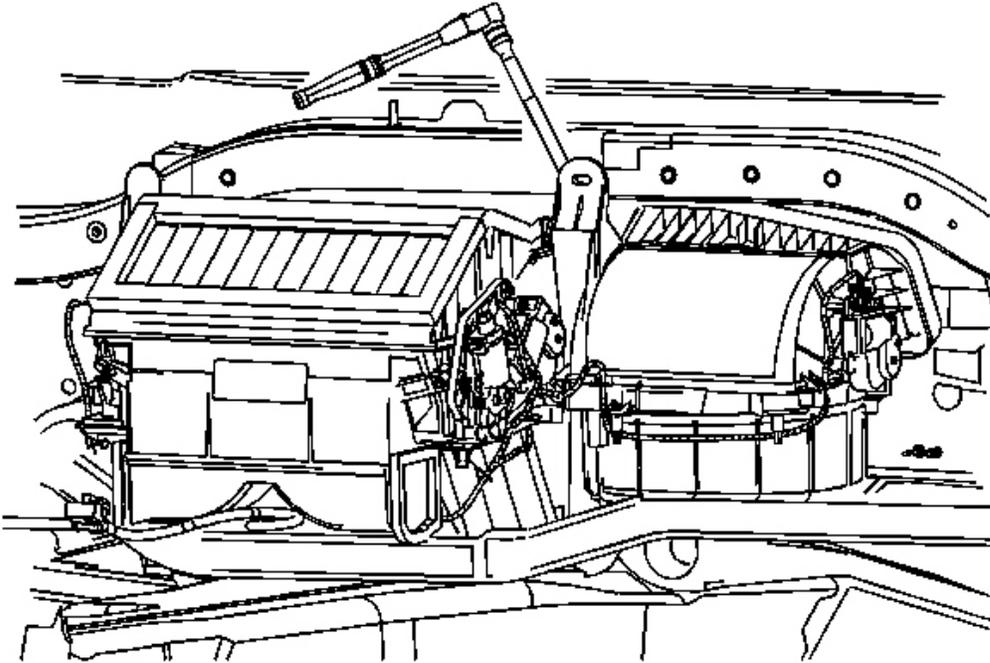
Identifying Front LH Recirculation Housing Retaining Screw
